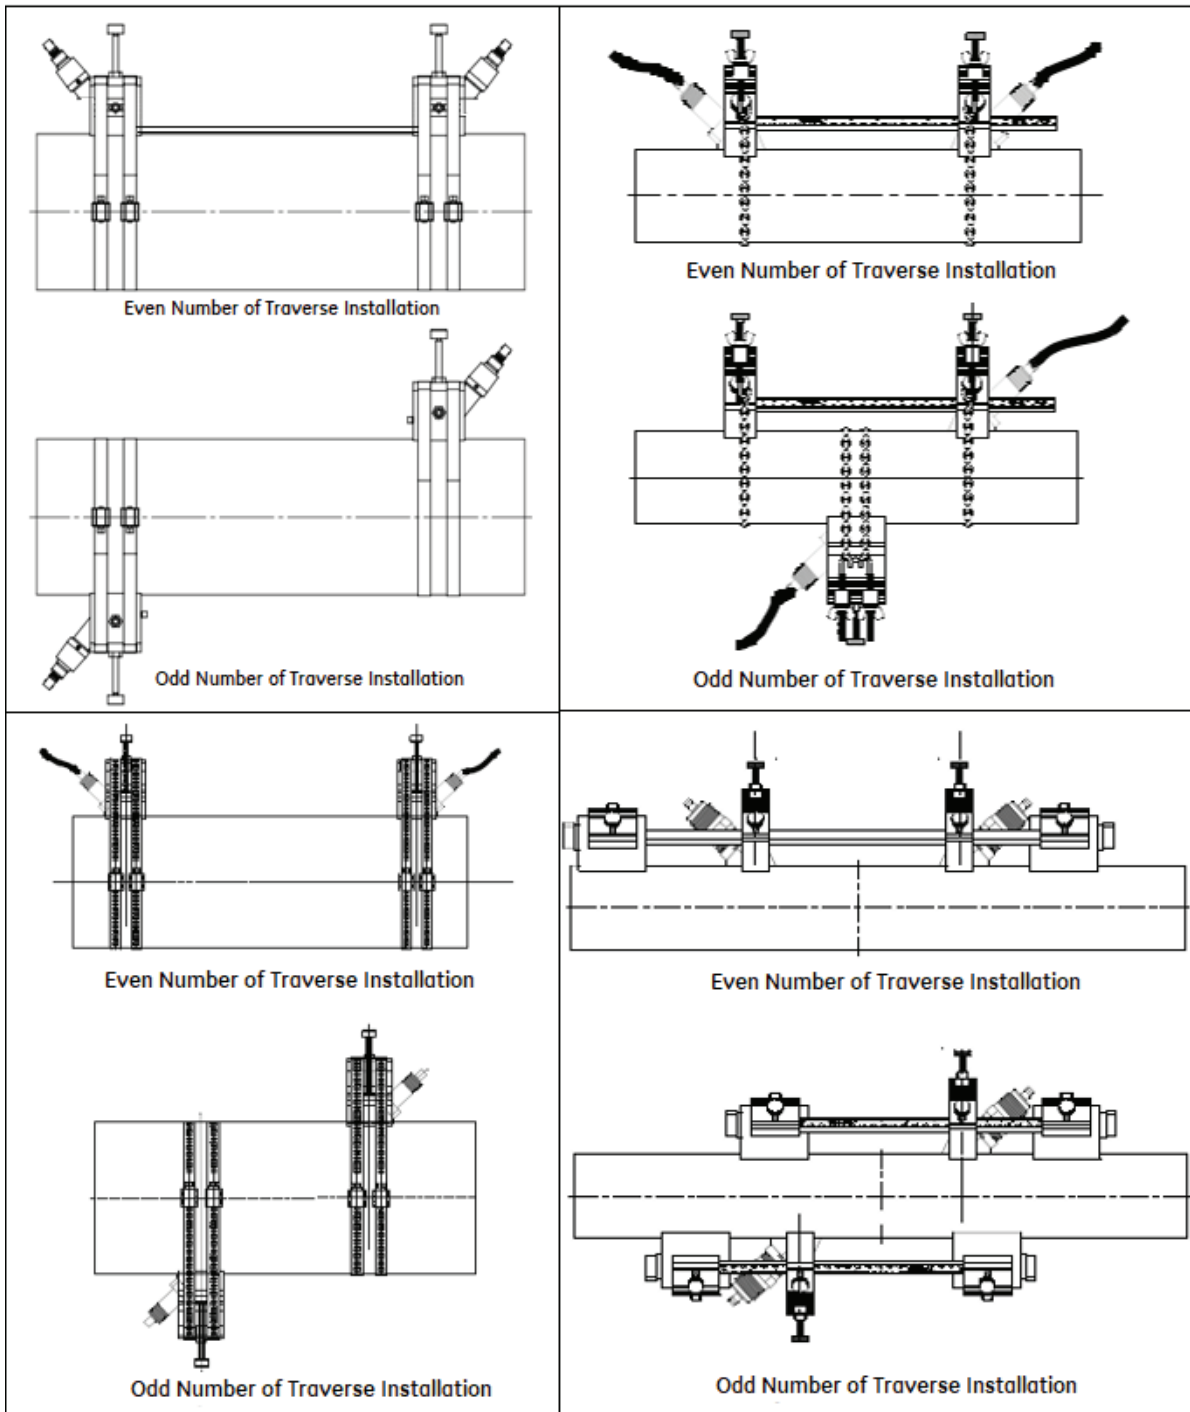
SCF clamping fixture (top left), UCF clamping fixture (top right), GCF clamping fixture (bottom left), MCF clamping fixture (bottom right)
